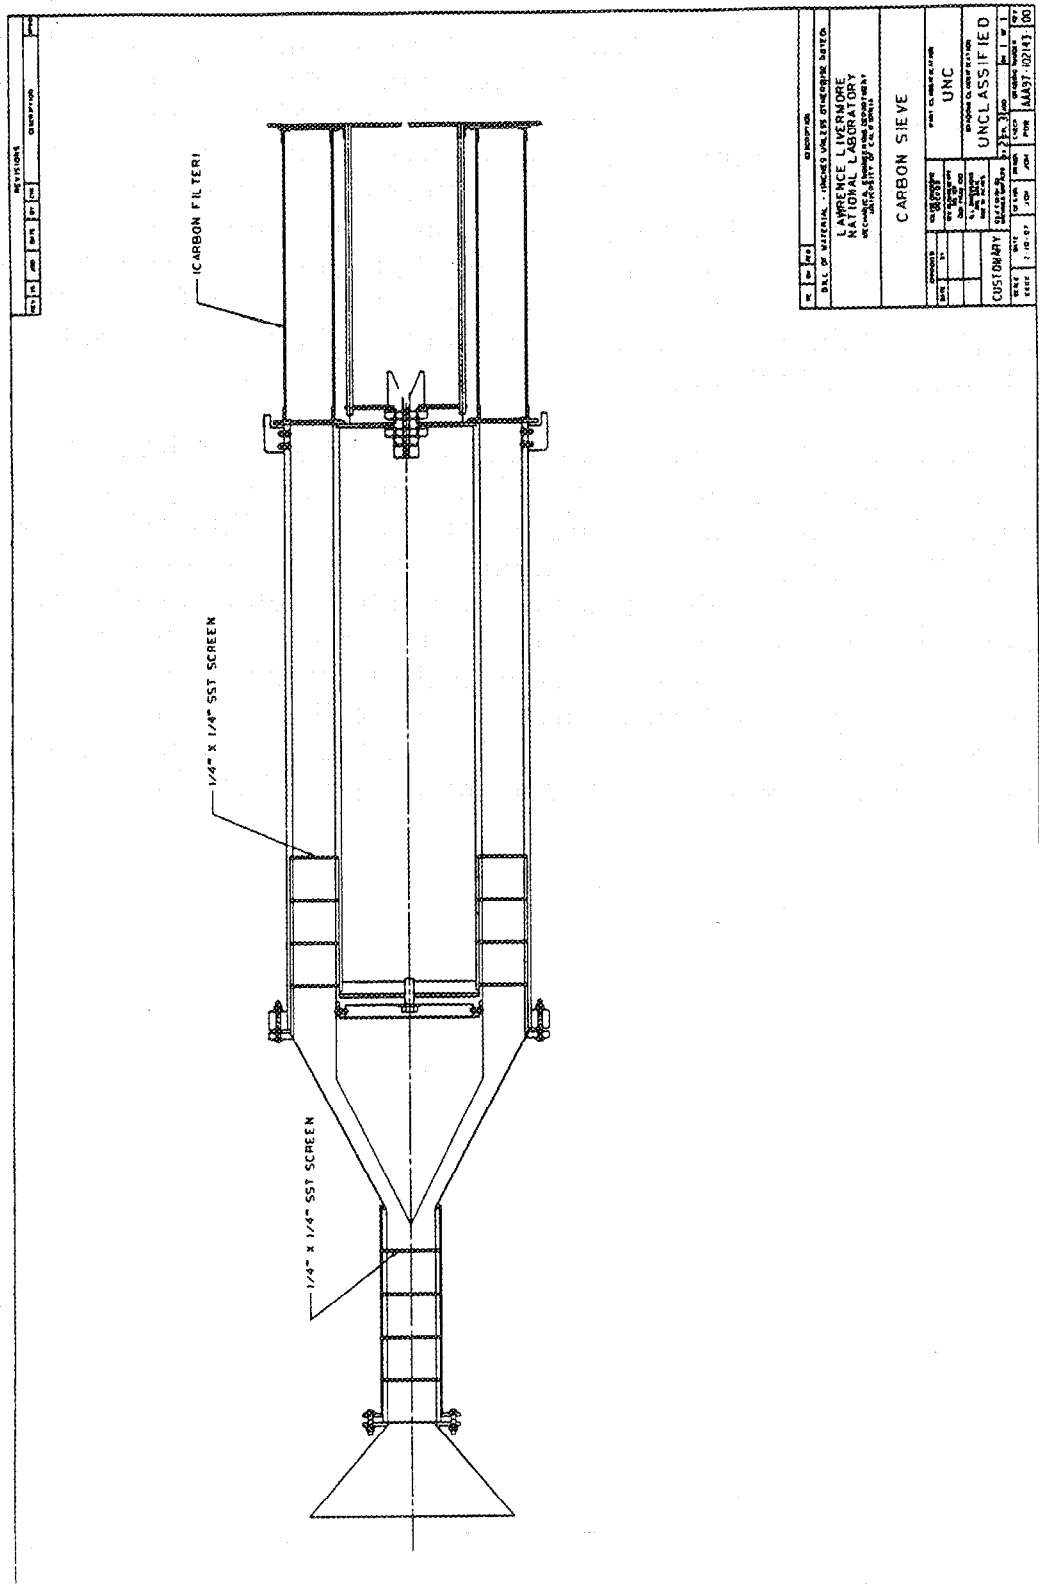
Schematic of carbon filling tube mounted over the carbon canister.
